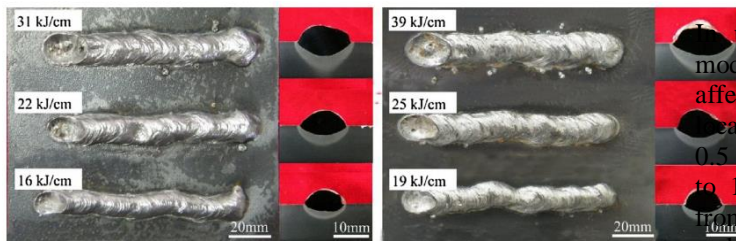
weld bead appearances and cross sections of the weld joints at different heat inputs.[3]
